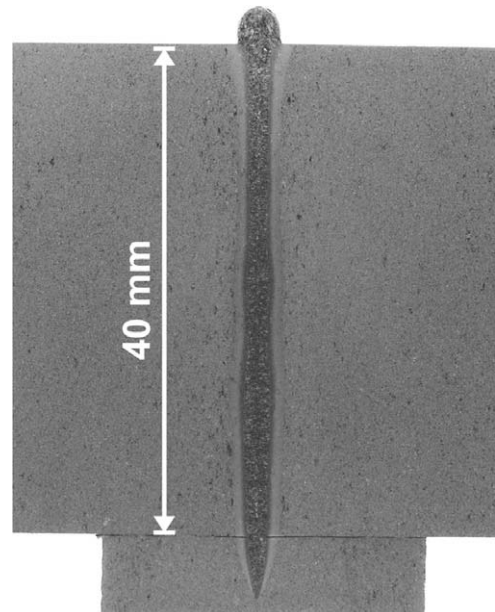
Cross-section of the 40 mm deep EB weld. The smaller plate at the bottom acted as beam stopper.
